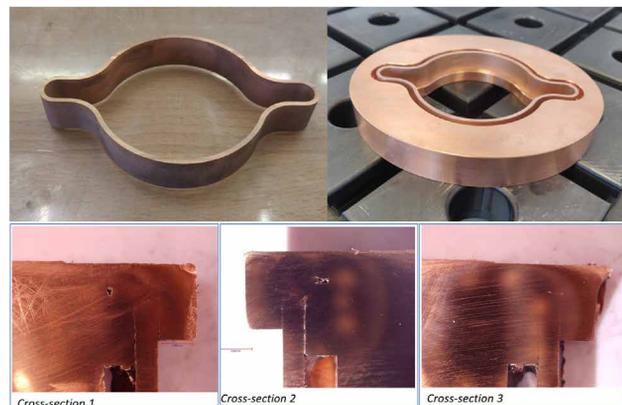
Short chamber extrusion, oval flange, and cross-section of the FSW tests, showing correct joining of the two parts.
